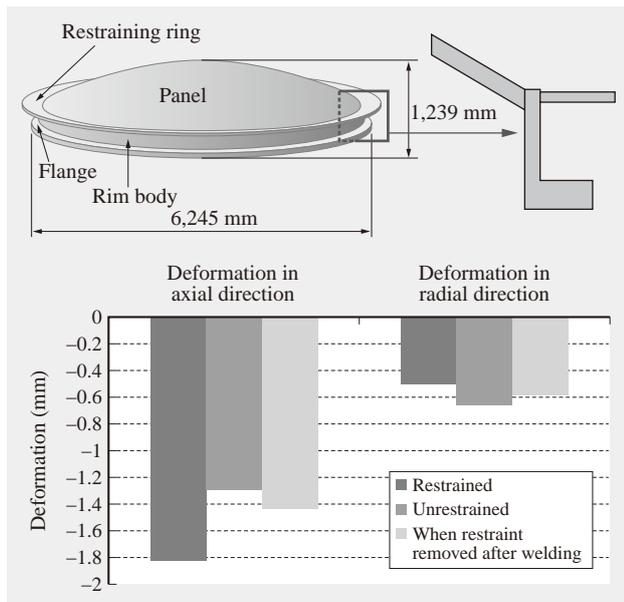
Example of Welding Distortion in Large Structure. It is possible to reduce the work associated with attaching the large welding jig used to reduce welding distortion.
